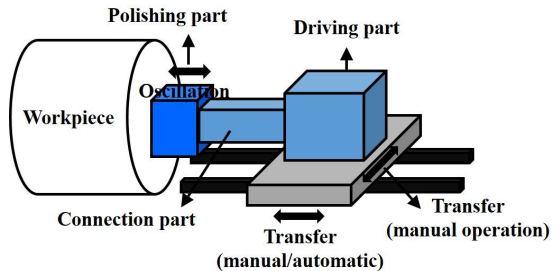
Conceptual design of cylinder inner surface superfinishing machine
